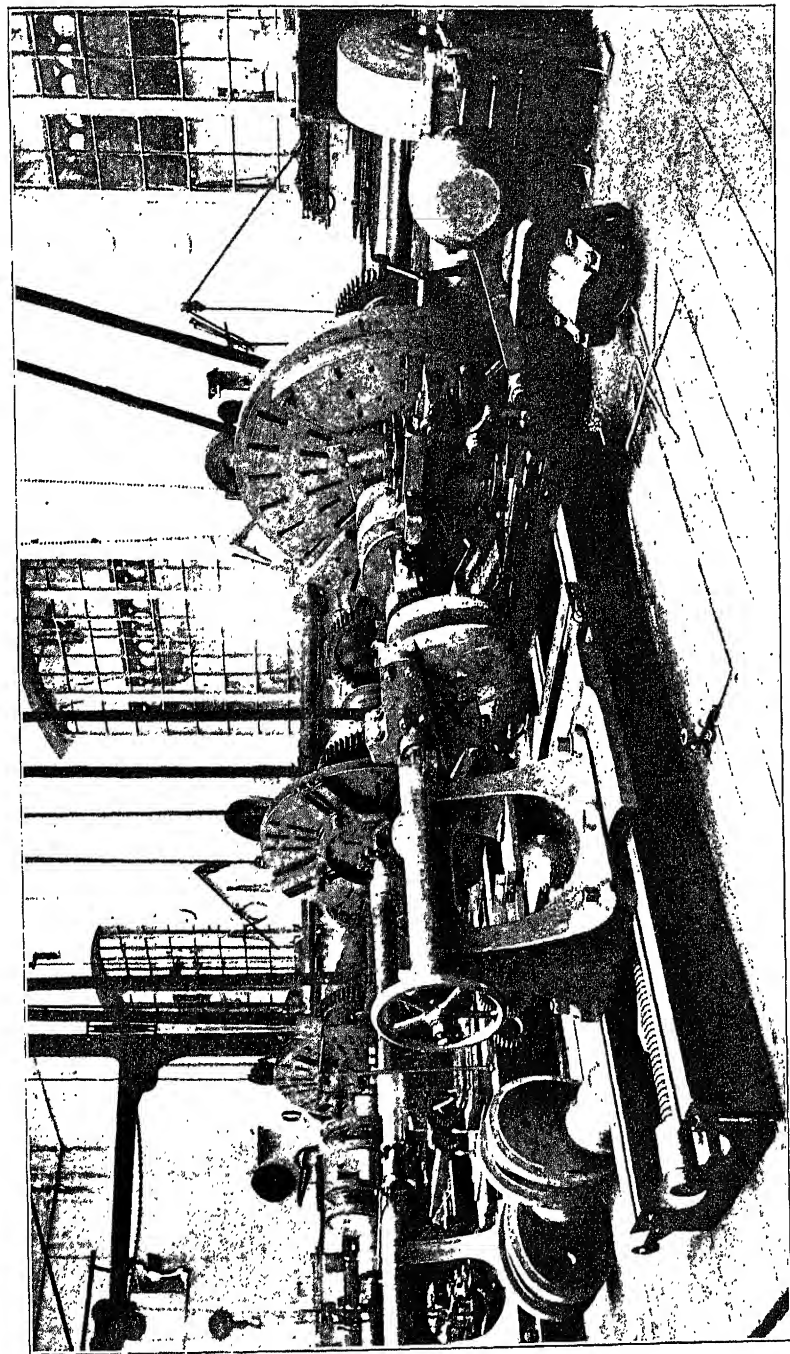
Turning the oval on locomotive engine crank shafts (Midland Railway Works, Derby.)
